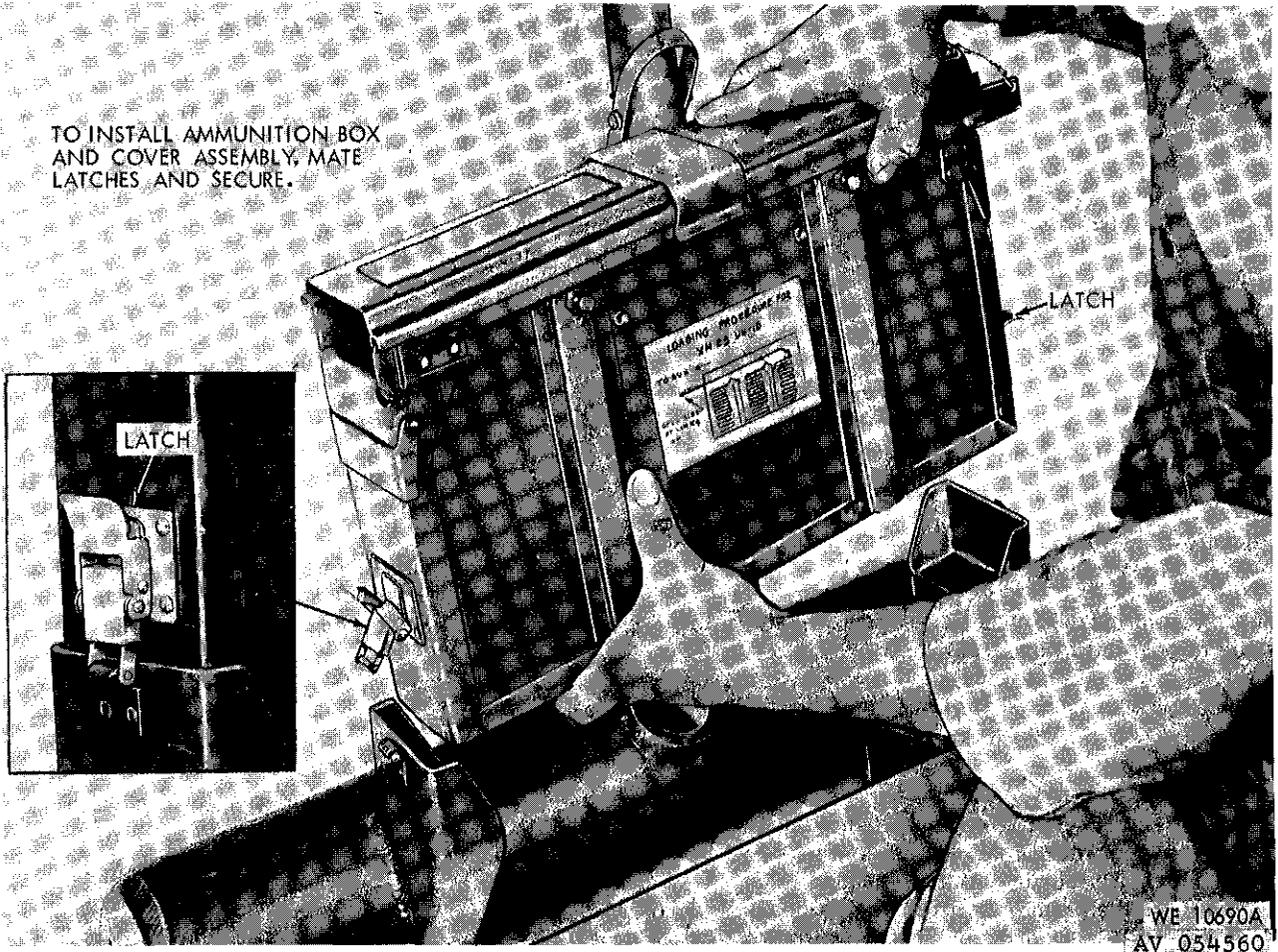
Installation or removal of ammunition box and cover assembly on tube assembly
